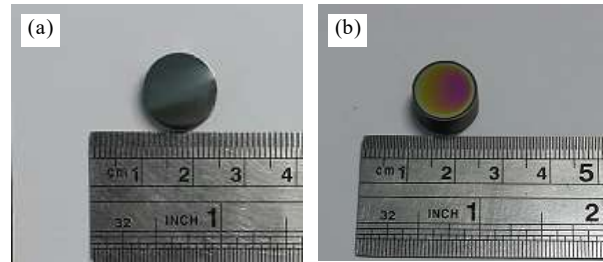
The surface of the test objects (a). raw material (b). specimen that has deposited TiN.
